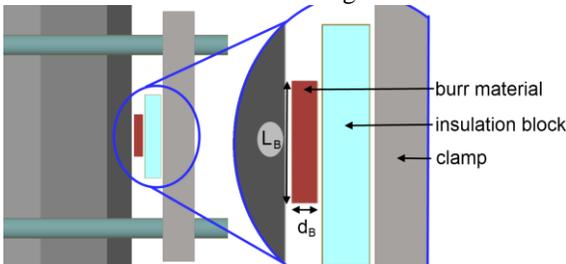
Top view of the burr clamping showing the insulation block, burr (copper tape) length L_B and thickness d_b .
